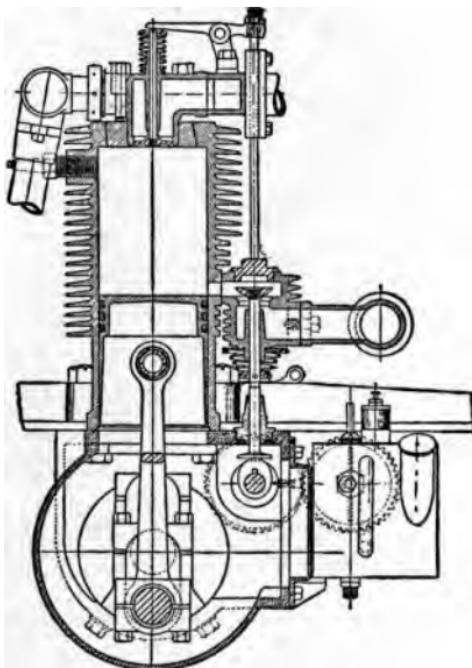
Section of a model of the Franklin engine, showing the auxiliary exhaust port and valve at the bottom of the piston sweep.
